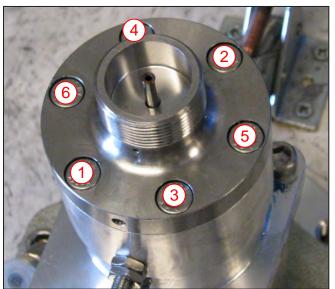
Apply anti-seize to the thrust housing bolts and tighten them in a crisscross pattern to "snug" using a 6mm Allen wrench.
